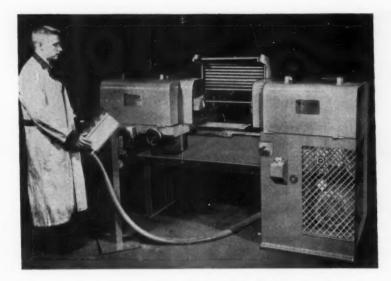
(Left) Pines double-end tube and pipe end-finishing machine
